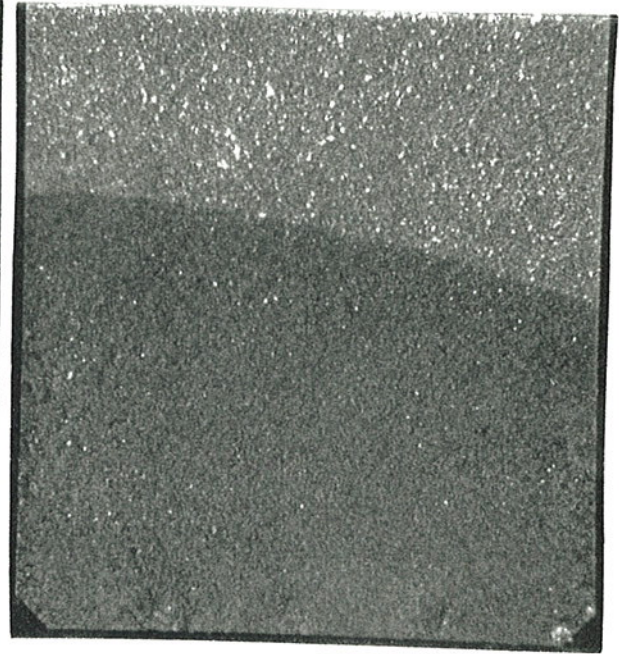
,b. Fracture Surface Showing Precrack Front Line in the SEPB Method.
